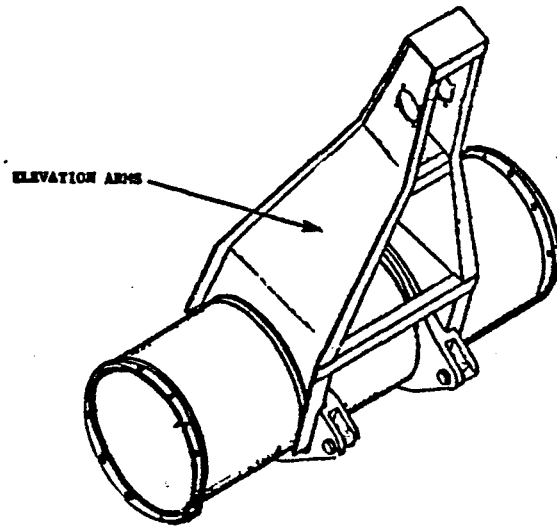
Elevation Arm and Center Torque-Tube Assembly
